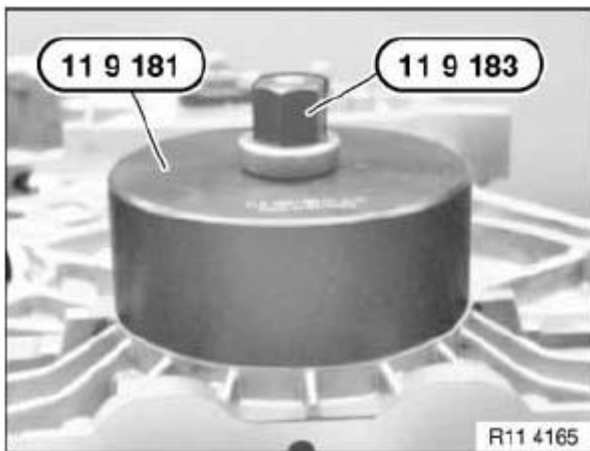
Identifying Special Tool (11 9 181) And (11 9 183)
